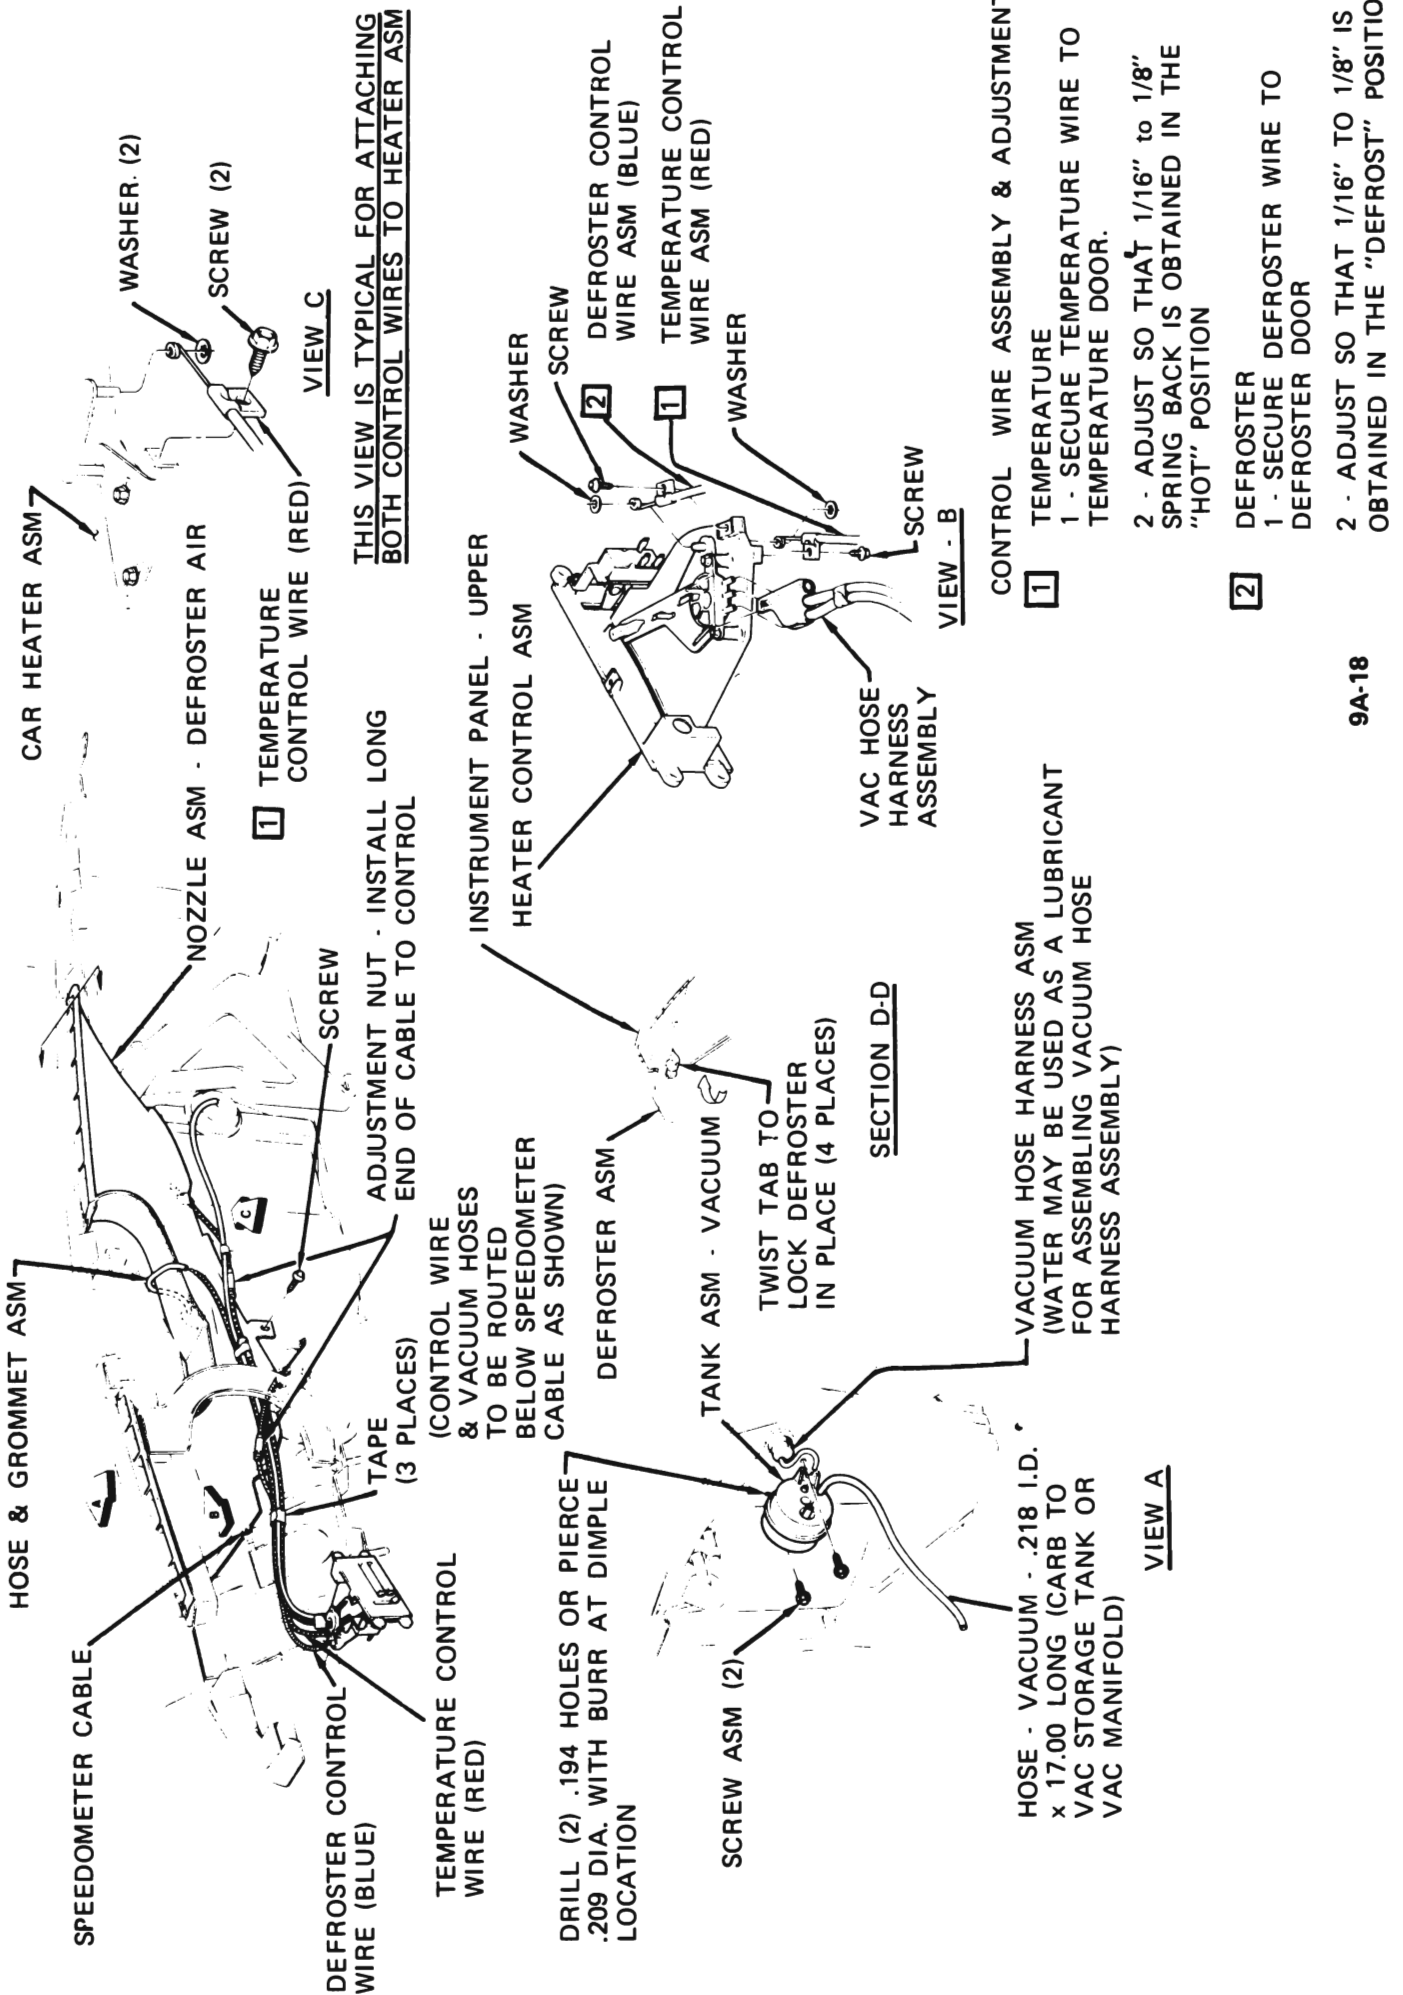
A-36 Heater and Defroster Vacuum Harness and Control Wires - B-C-E Series
